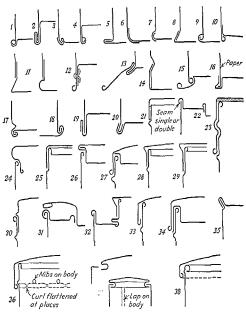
Attachment of tops and bottoms to sheet-metal container. (Mills.18)
